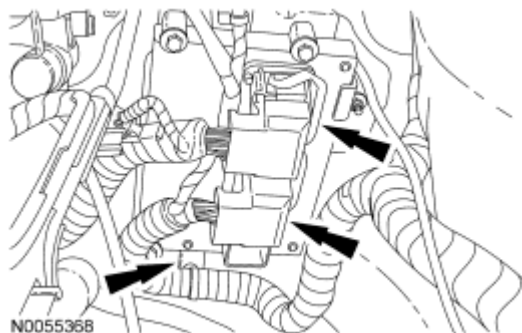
Identifying Electrical Connectors From Power Control Module (PCM)
